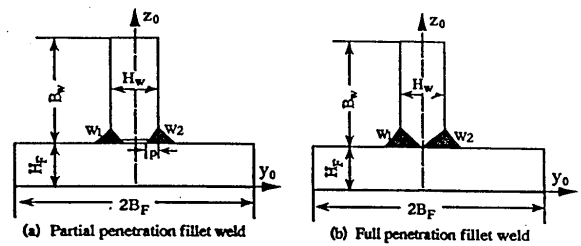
Partial and full penetration T-type fillet welds
